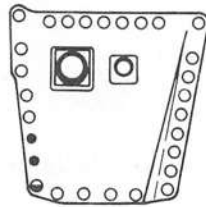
Internal Access Door Fastener Patterns (Sheet 2 of 3)
